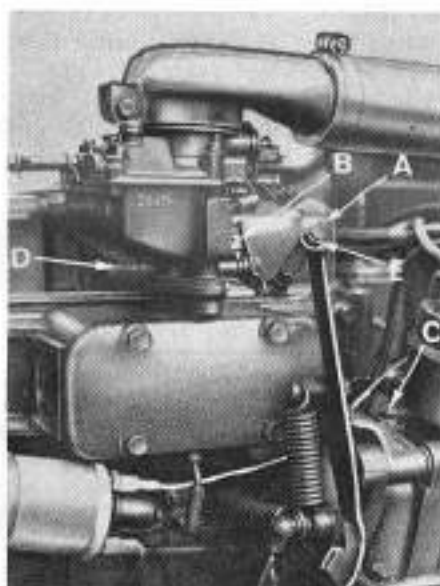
View showing governor adjustment points for models 3800 and 4600.
